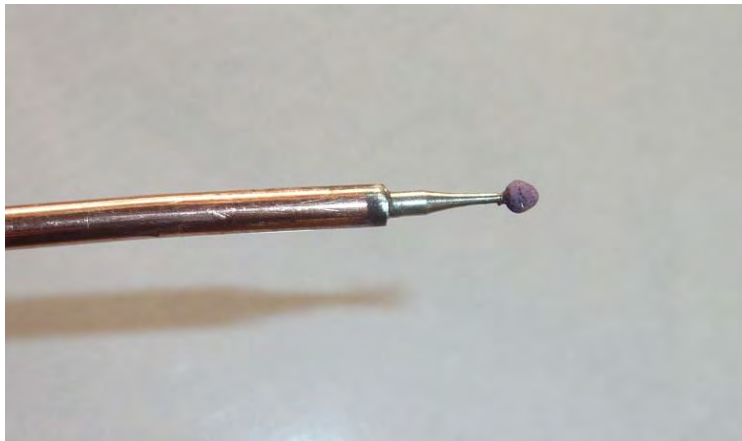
Rod with grinding stone used for roughening the inner surface of tubes.
